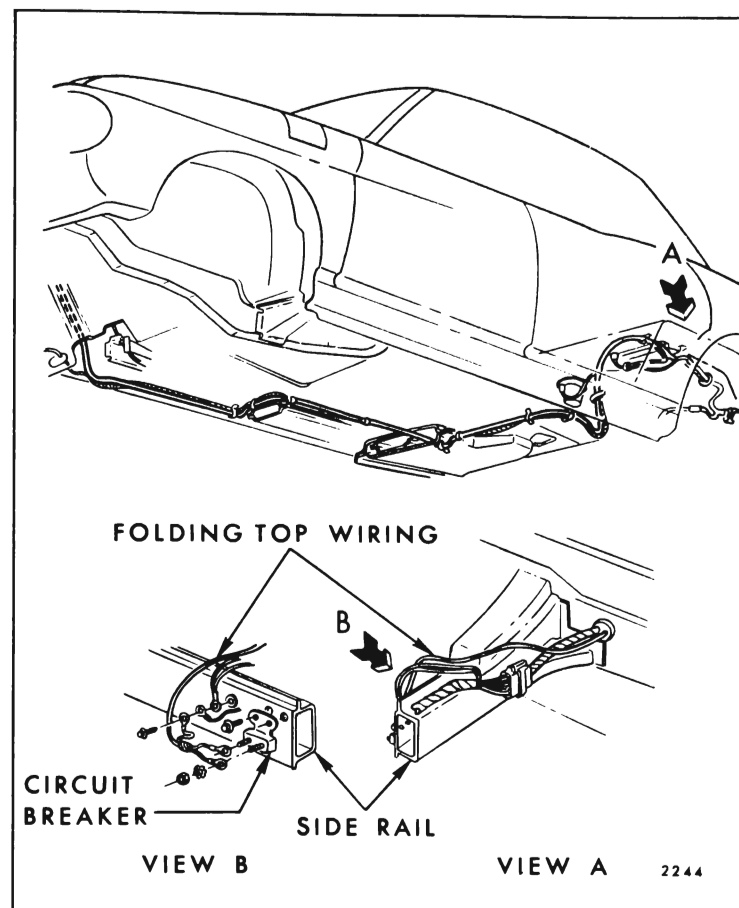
Electric Folding Top Body Wiring - Corvair
